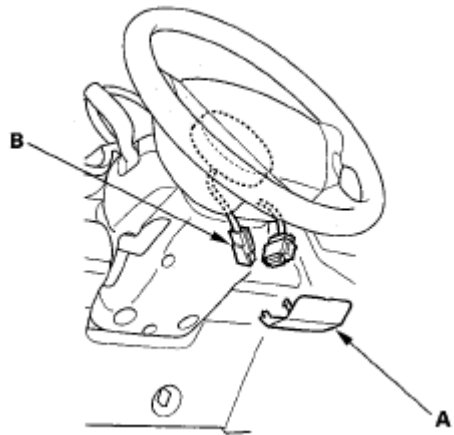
Identifying Access Panel And Driver's Airbag 4P Connector
